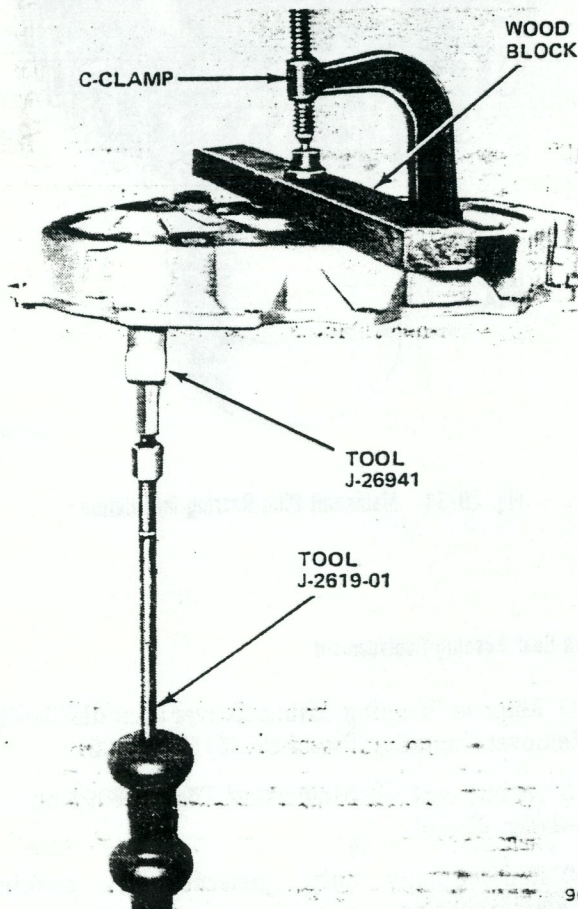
D-29 Front Output Shaft Rear Bearing Removal
